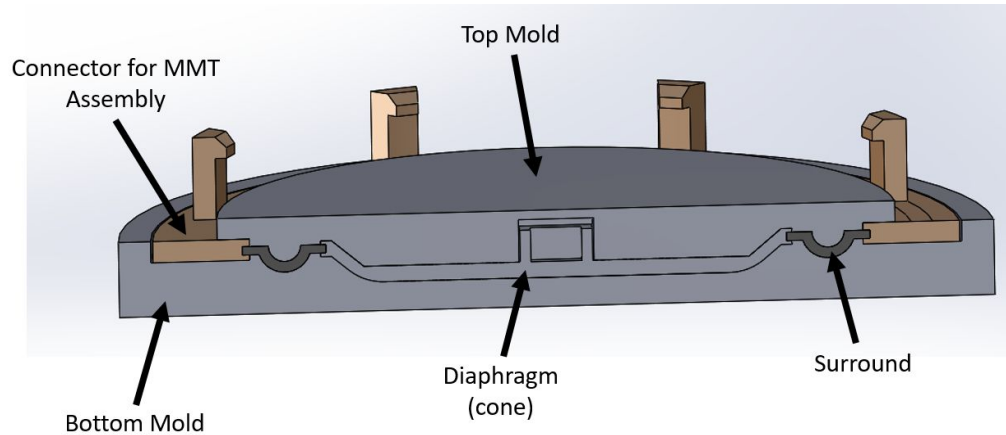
Section View of Molds, Moving Magnet Parts and Surround
